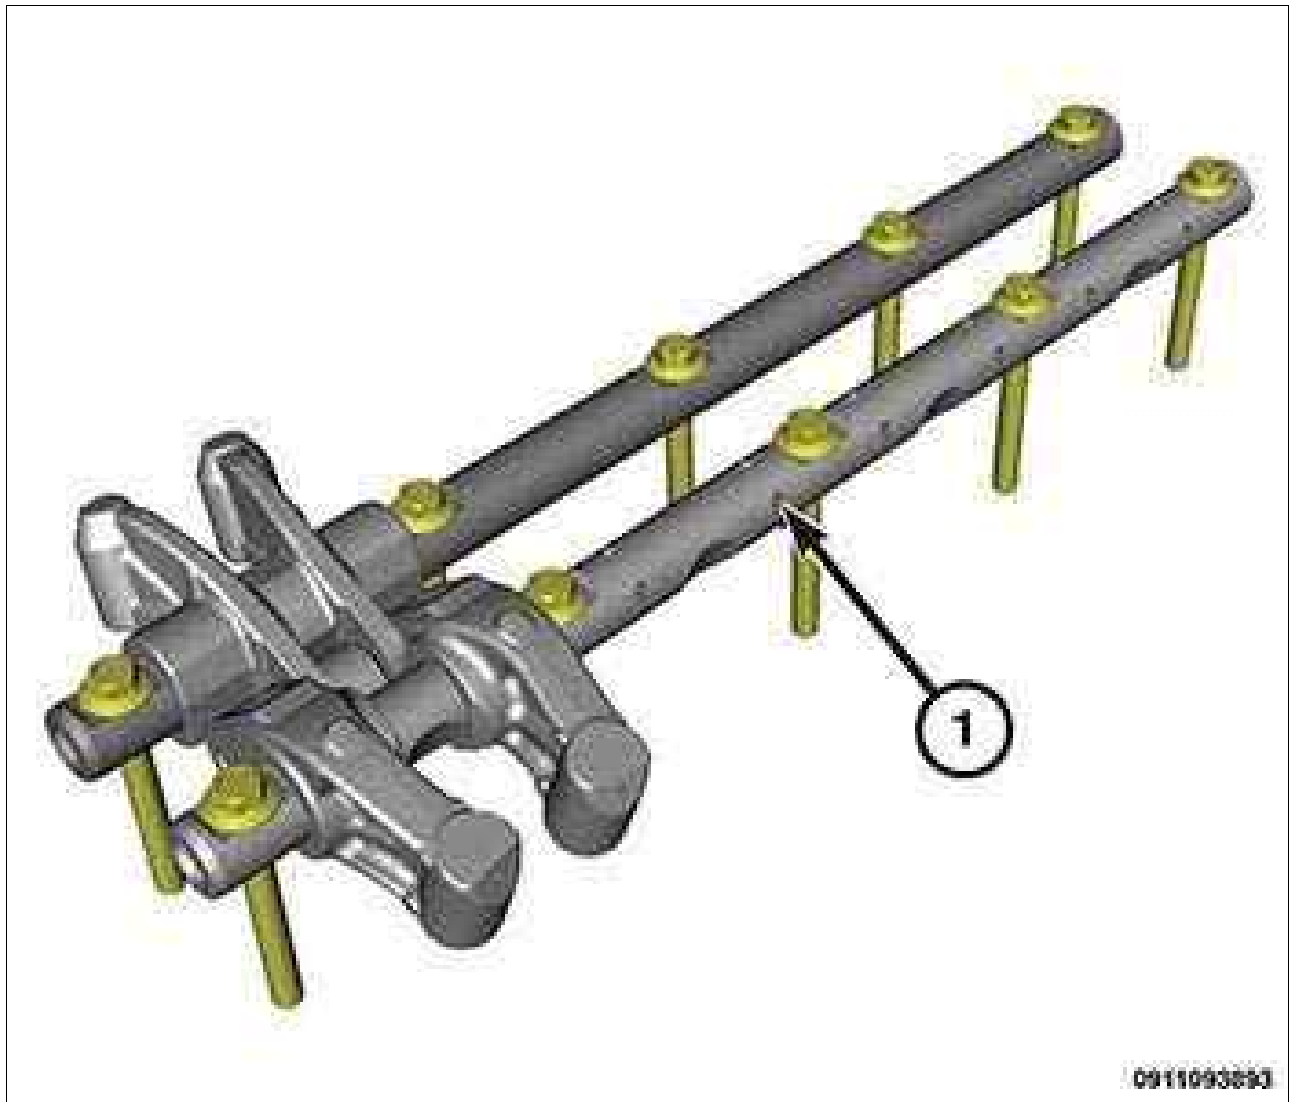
Exhaust Side Rocker Arm, Roller Bearing & Hydraulic Tappet
